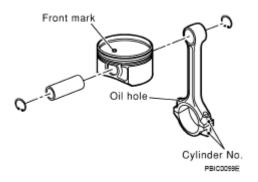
Identifying Piston Pin Snap Ring Into Front Of Piston
